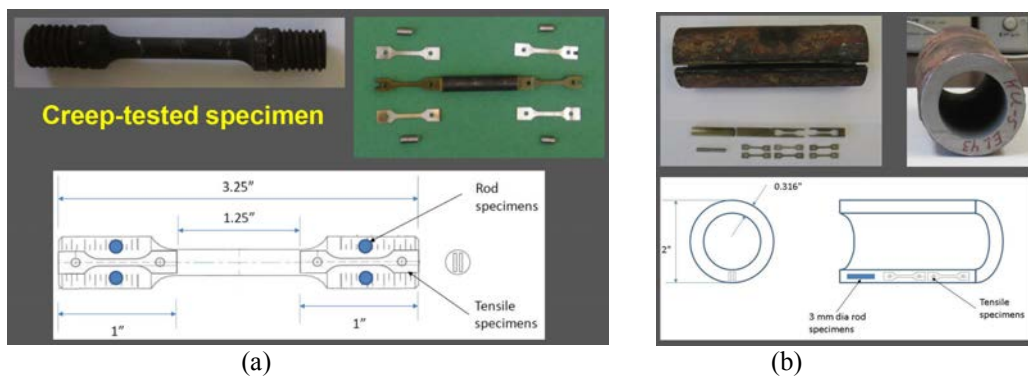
Fabrication drawings of subsized tensile specimens and rod specimens from (a) an archived G91 creep-tested specimen, and (b) G91 tube removed from the Kingston plant.
